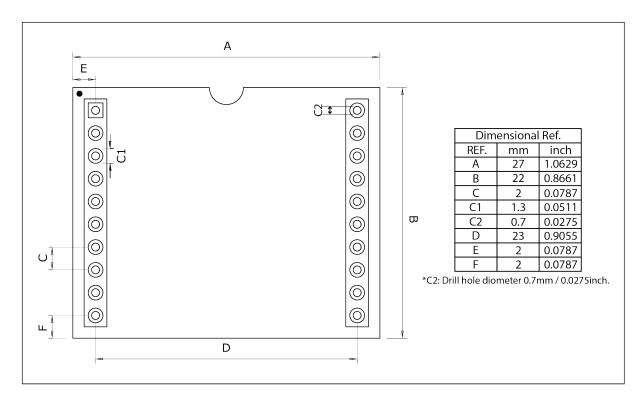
Recommended PCB layout for SM5210-MINI module (MINI20 package)
